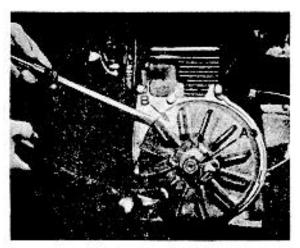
Removing Flywheel A - Flywheel Nut B - Flywheel
